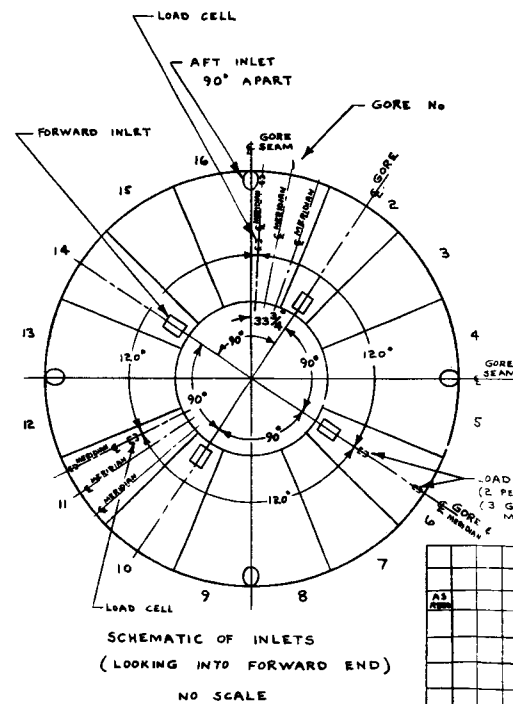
Model Assembly with 60-In. Dp (Sheet 5)
